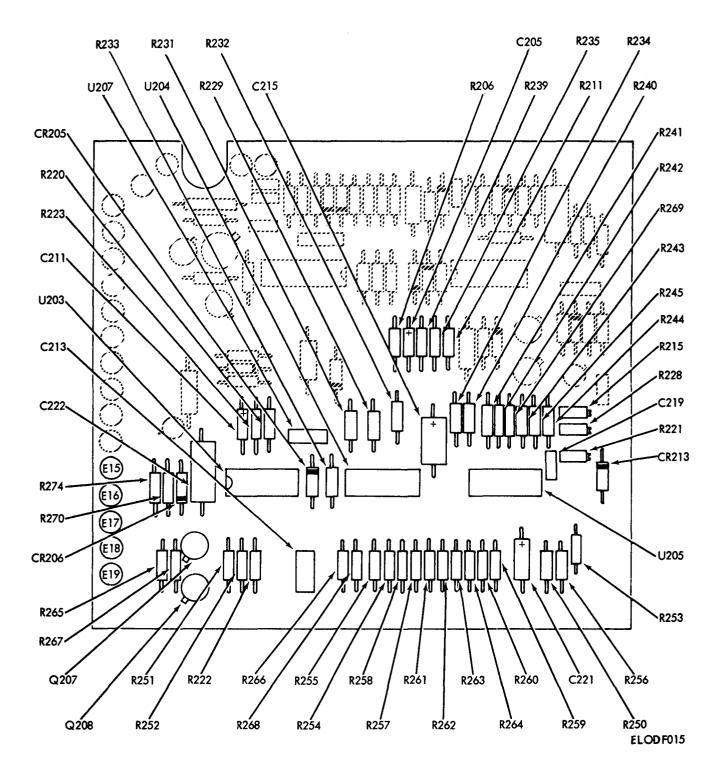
(2)AØ modulator and current sense printed circuit board assembly (A2) (sheet 2 of 2).
